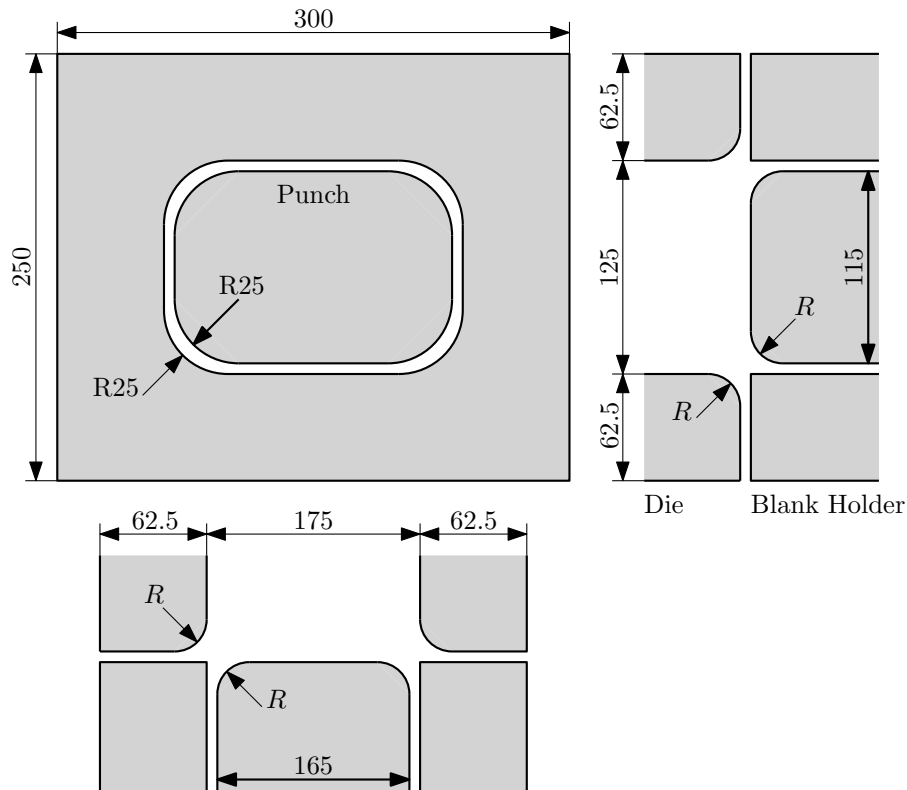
Drawing of a panel - Scheme of the drawing process (units in mm).
